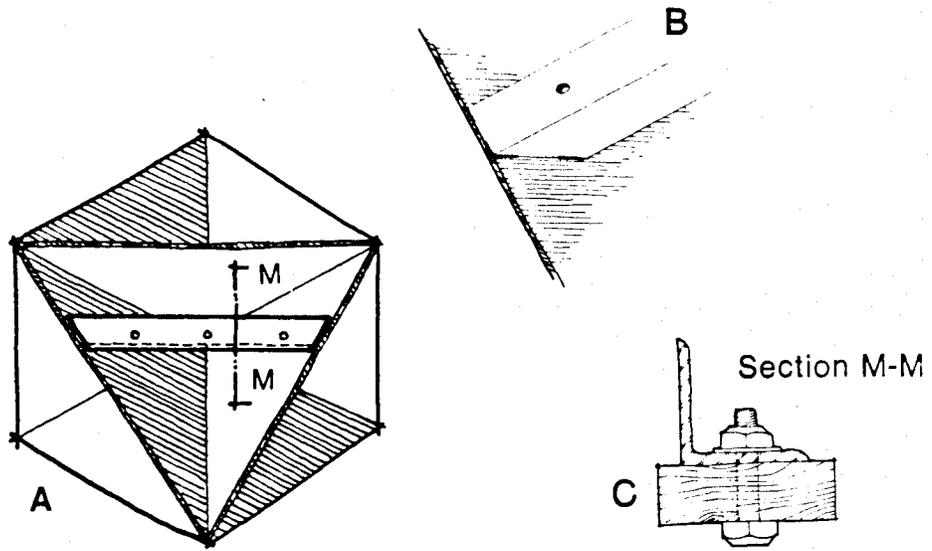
One method of mounting a reflector in the "rain-catching" position is to tack weld an angle or channel between two adjacent surfaces, as suggested in details A and B. Drill the angle and crossbar, and bolt the reflector atop the crossbar, as suggested in detail C. Or tie the reflector into a stay that forms an approximately 45° angle with the horizontal.
